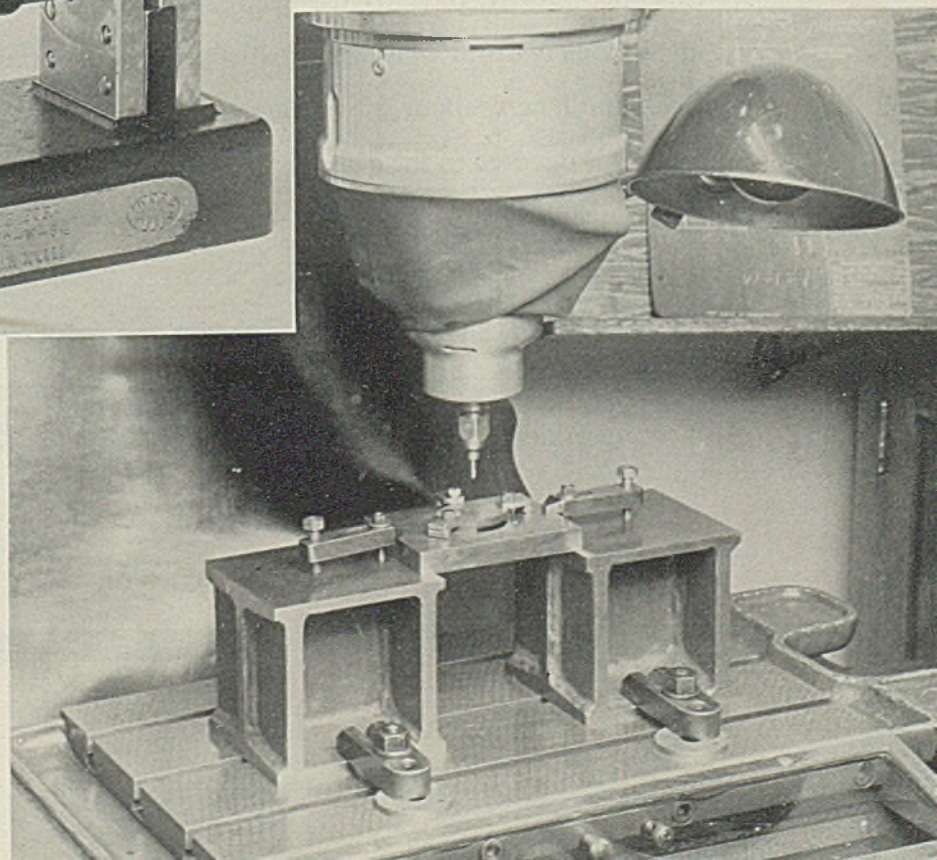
(right)—Master gage clamped in position for grinding of holes: Tolerance on this work is 0.001-inch
